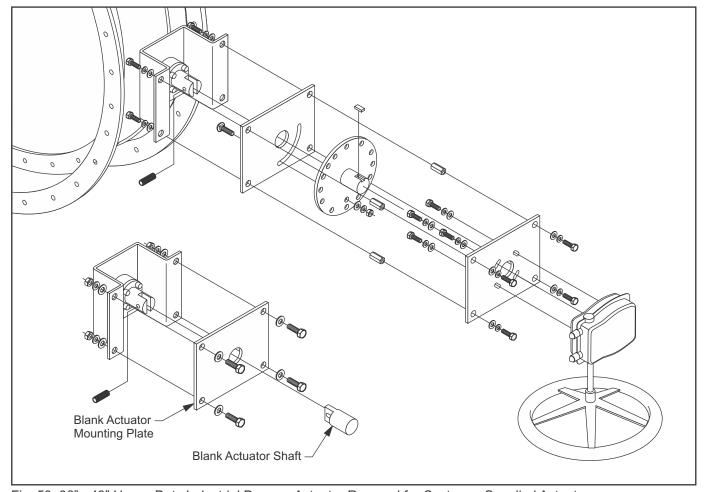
36" - 48" Heavy Duty Industrial Damper Actuator Removal for Customer Supplied Actuator.
